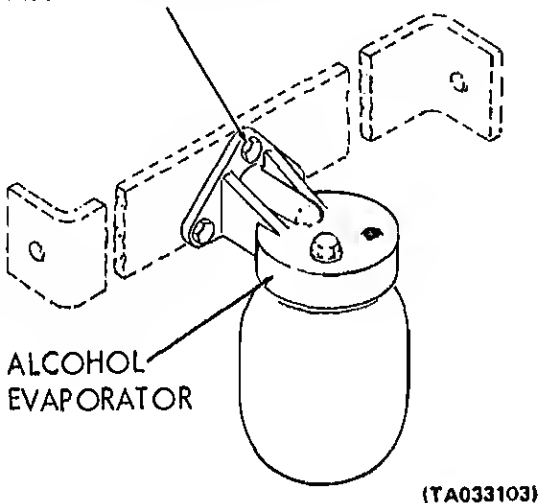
Alcohol evaporator assembly, removal and installation.
